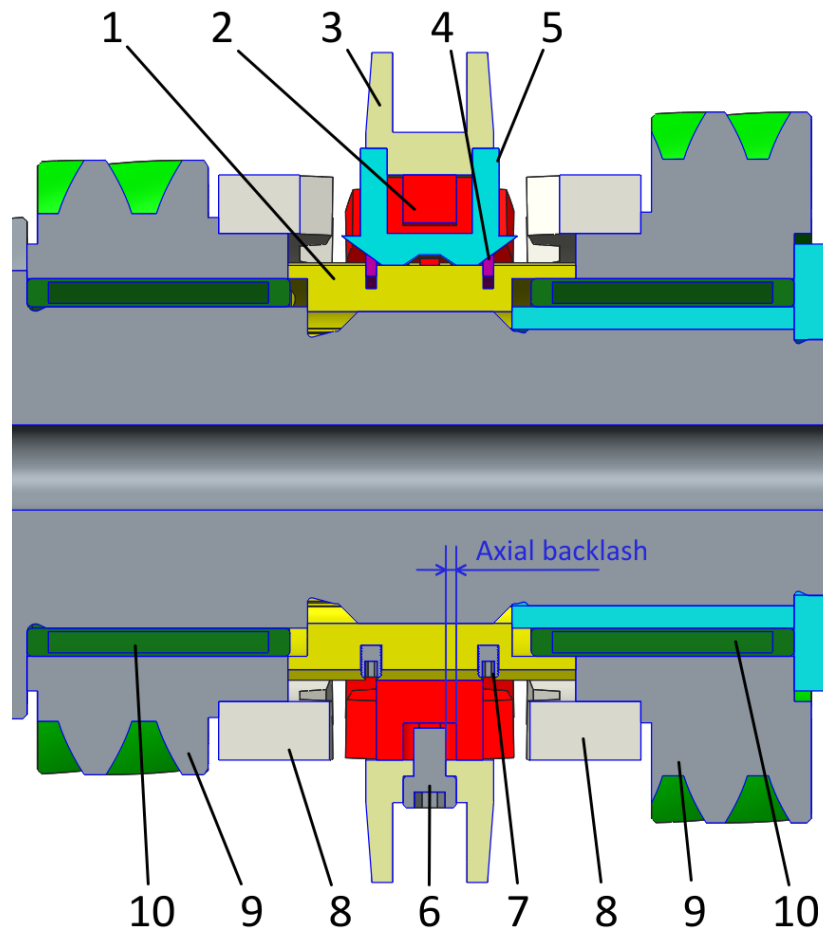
Dog clutch with blocking mechanism mounted into the MQ200 gearbox [43]
